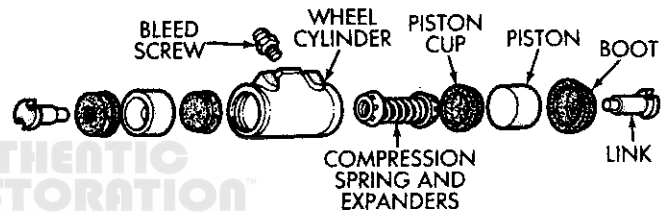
Wheel Cylinder—MJ—10-Inch Brake
